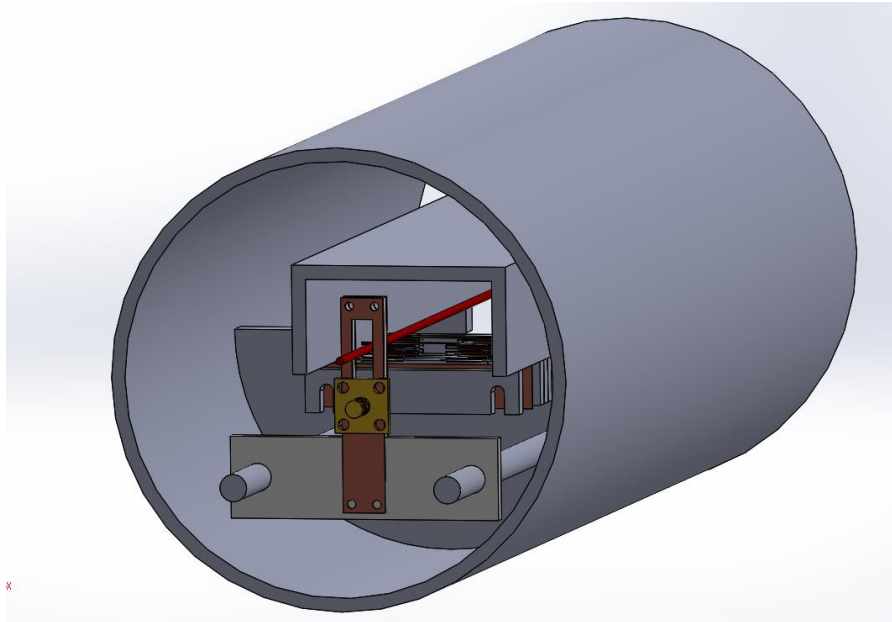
CAD drawing of full hot test configuration including the MTM assembly, VM structure, and the electron beam
